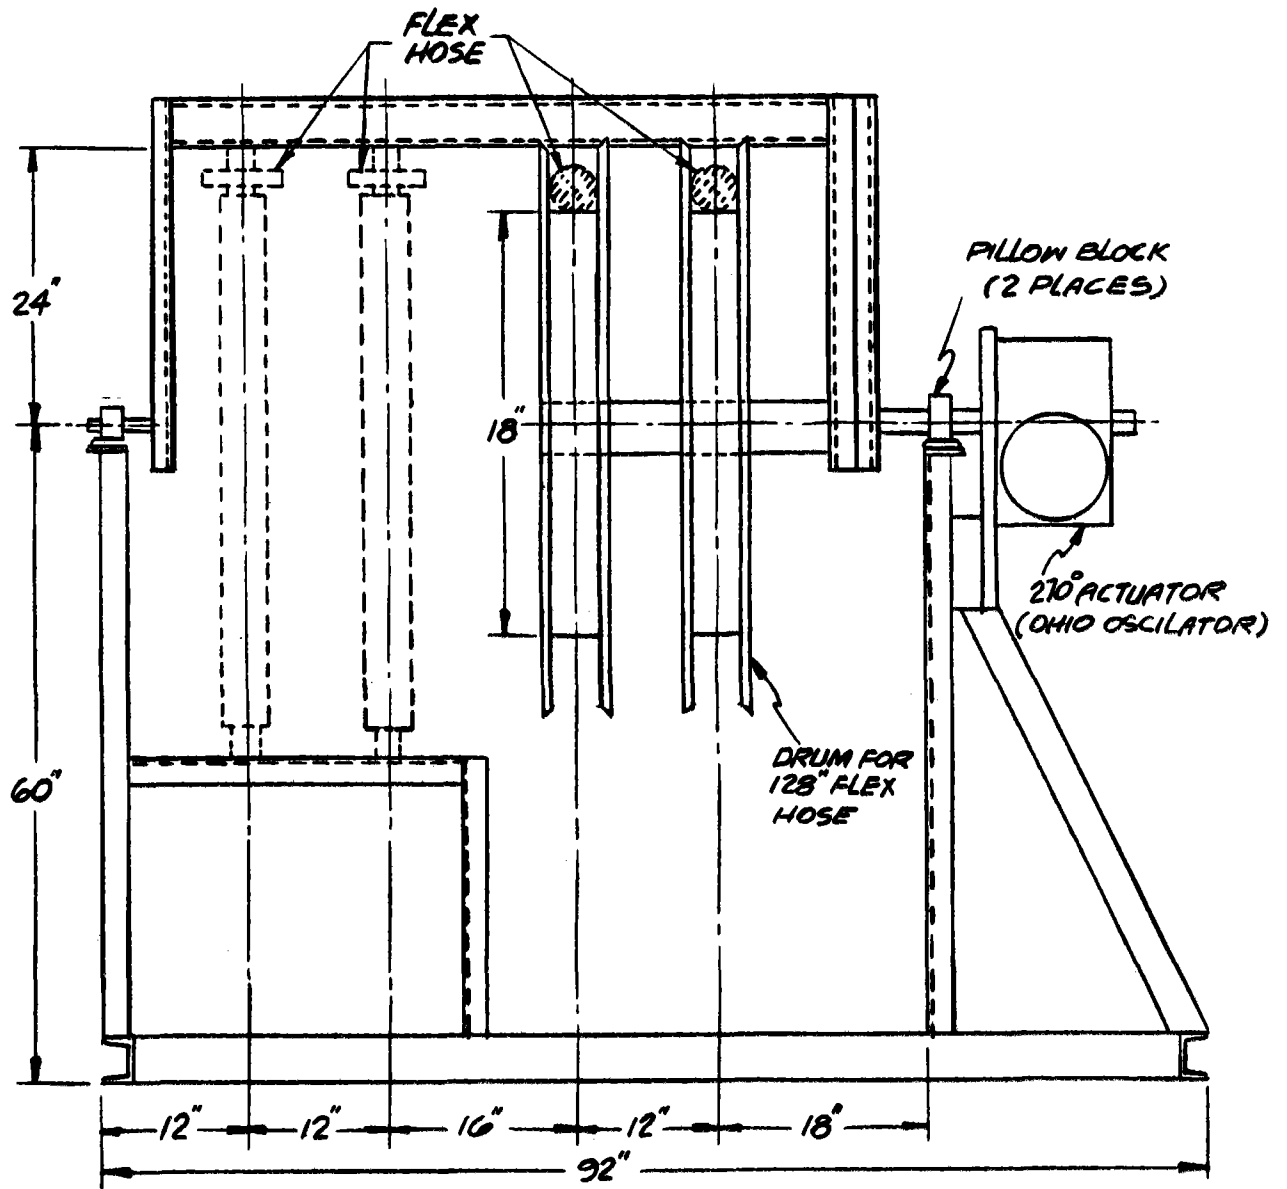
FLEXIBLE METAL HOSE TEST FIXTURE
